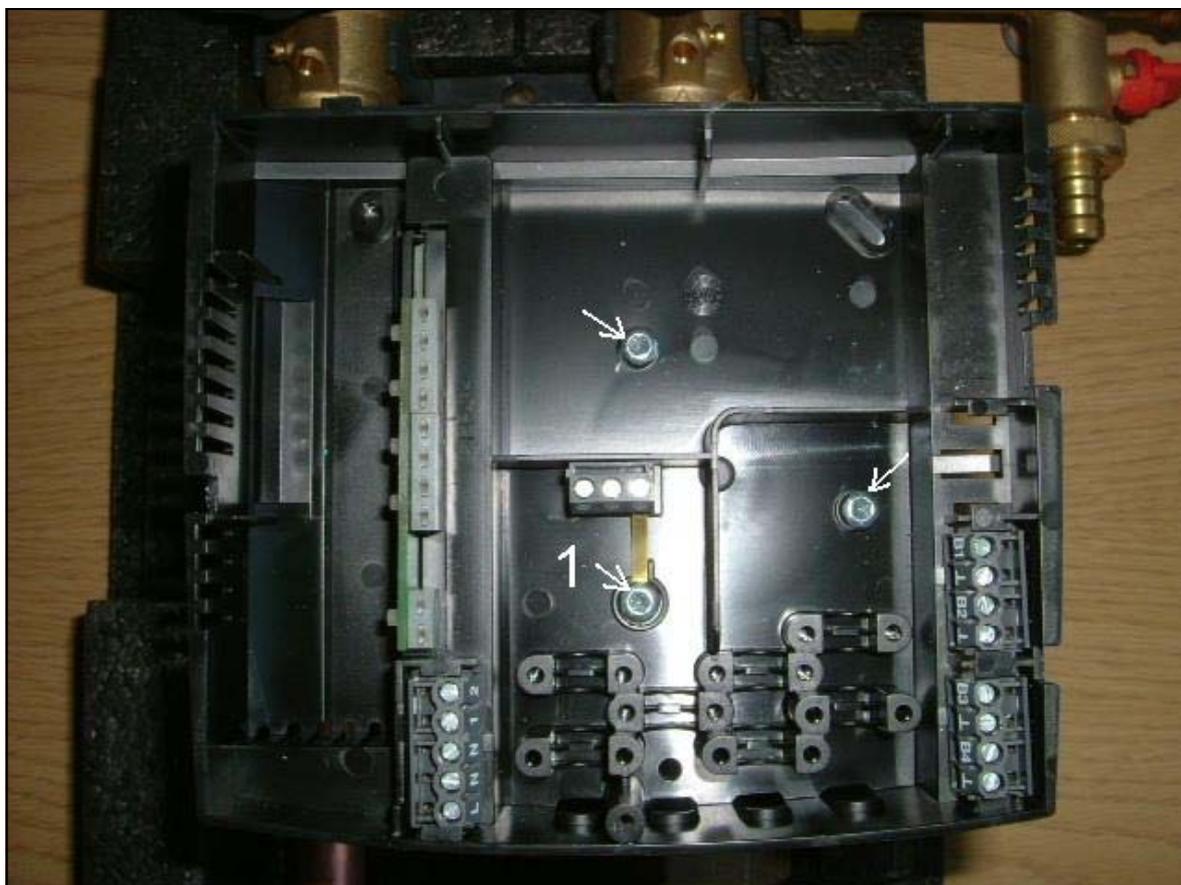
Rear Of Controller Housing Assembled On Pump
